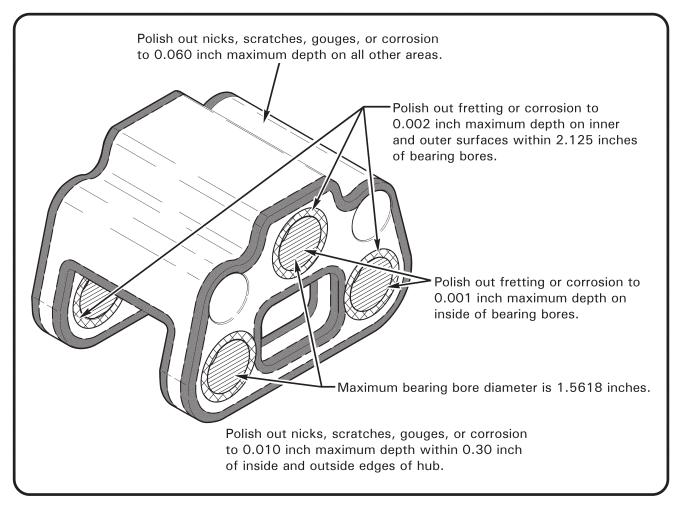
MAIN ROTOR HUB REPAIR LIMITS
